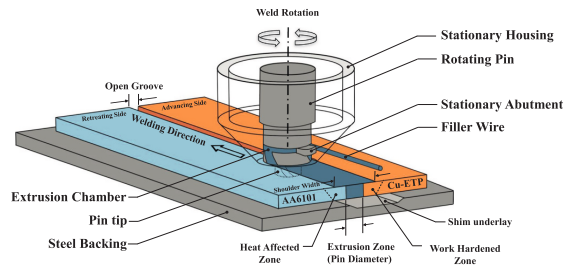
Schematic illustration of HYB PinPoint extruder for butt joining Al-Cu. Prior to the joining operation the two base plates are clamped onto a steel backing with a fixed spacing of 4 mm, where the aluminum plate is placed on the retreating side (RS) and the copper plate on the advancing side (AS) of the joint.
